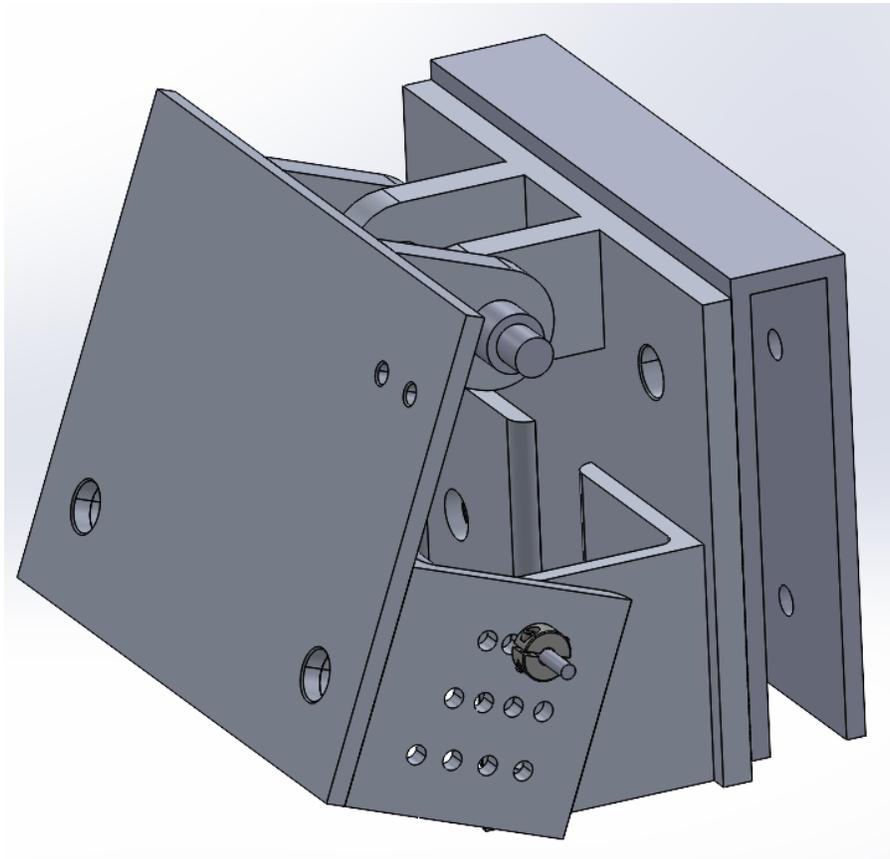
Assembly of the Hull Mount and the Trim Angle Adjuster.
